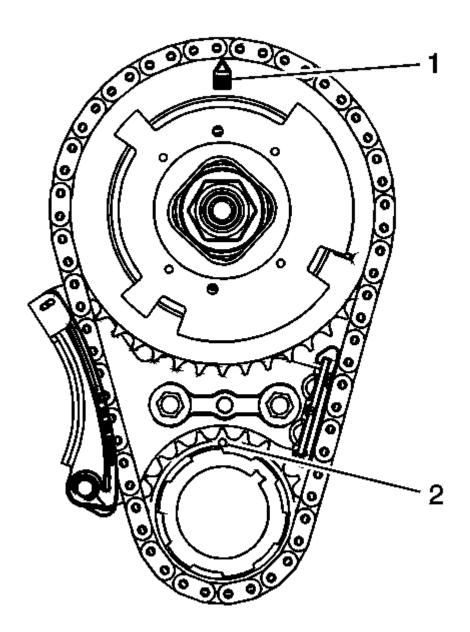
View Of Camshaft & Crankshaft Sprocket Alignment Marks Courtesy of GENERAL MOTORS CORP.
